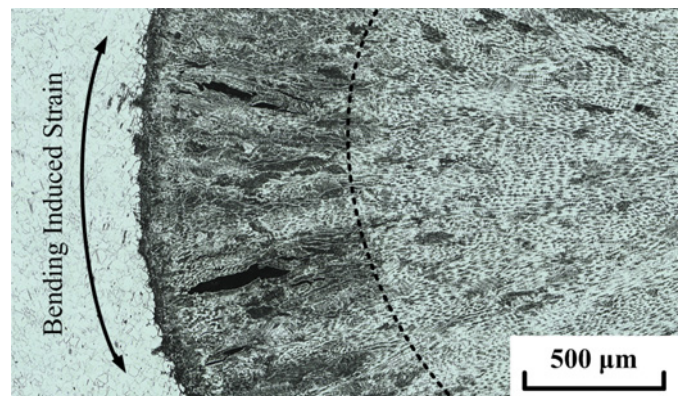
Location of solidification cracks in GTA spot-on-plate weld.
